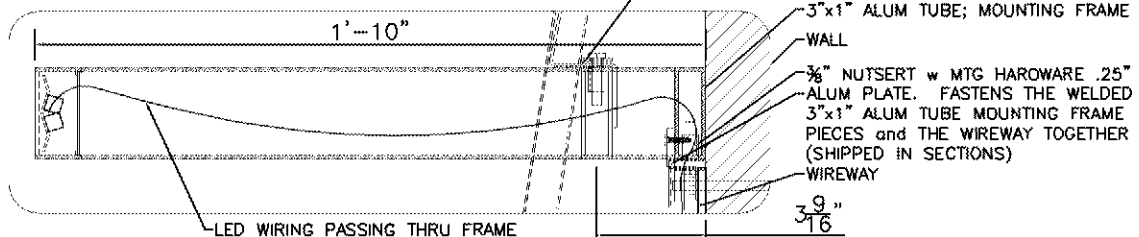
PLATES WILL BE WELDED TO THE VERTICAL ALUM FRAME MEMBERS AND THE WIREWAYS AT THE ENDS. FASTENED TO THE HORIZDNTAL FRAME MEMBERS USING 3/8" NUTSERTS / 3/8" HARDWARE.
